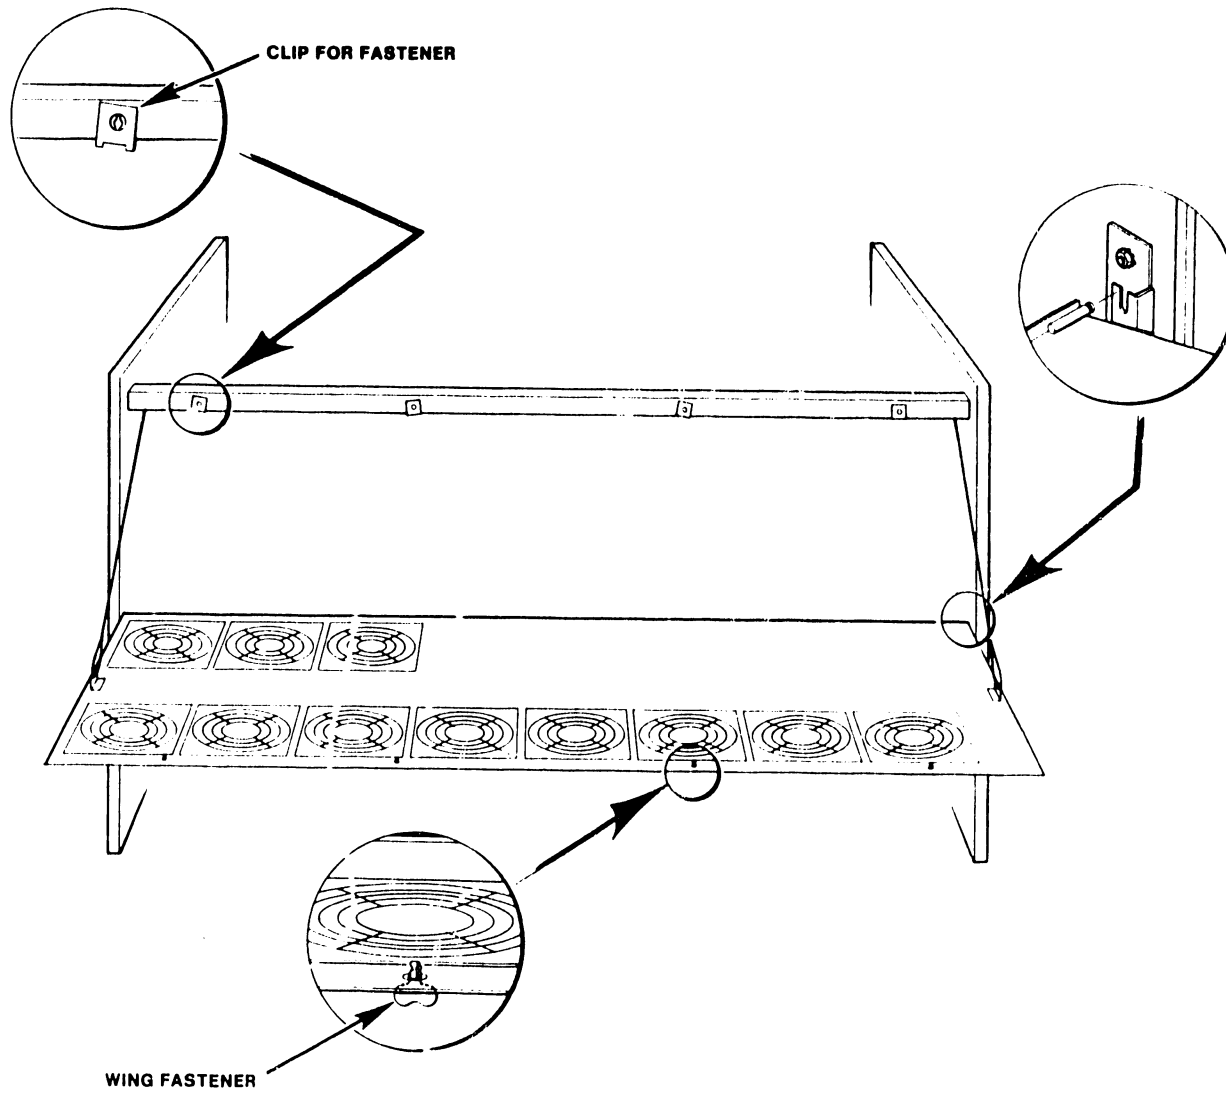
LOWERING THE FAN ASSEMBLY
